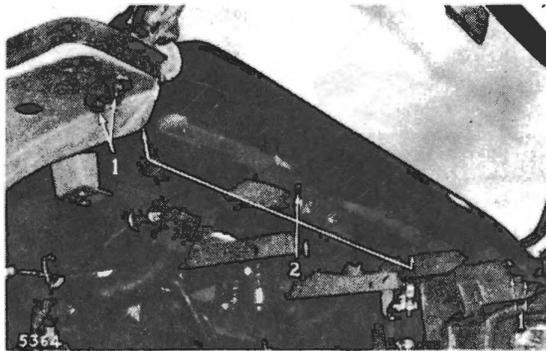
Location of Alpine windscreen assembly retaining nuts. (Facia removed for clarity).
